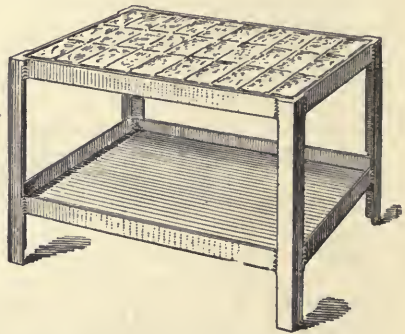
Welding table of angle iron entirely constructed with the blowpipe.
